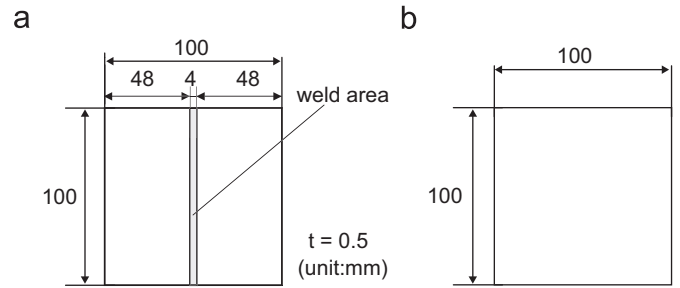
Schematic diagram of the stainless-steel square sample: (a) with weld and (b) without weld.
